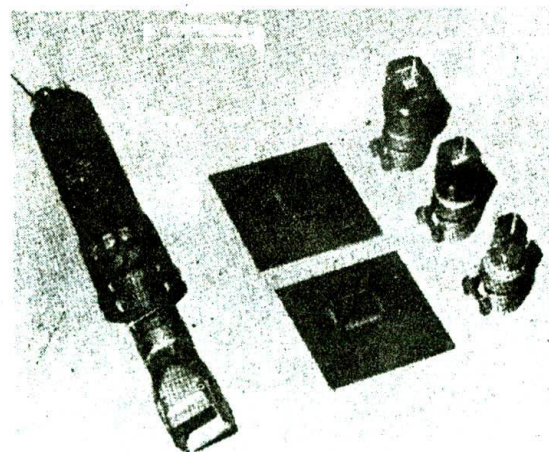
Leister-Labor S hot-air contactless desoldering and soldering tool for removing and replacing leaded and surface mount components on PC boards. (Courtesy Brian R. White Co., Inc., Ukiah, California.)
